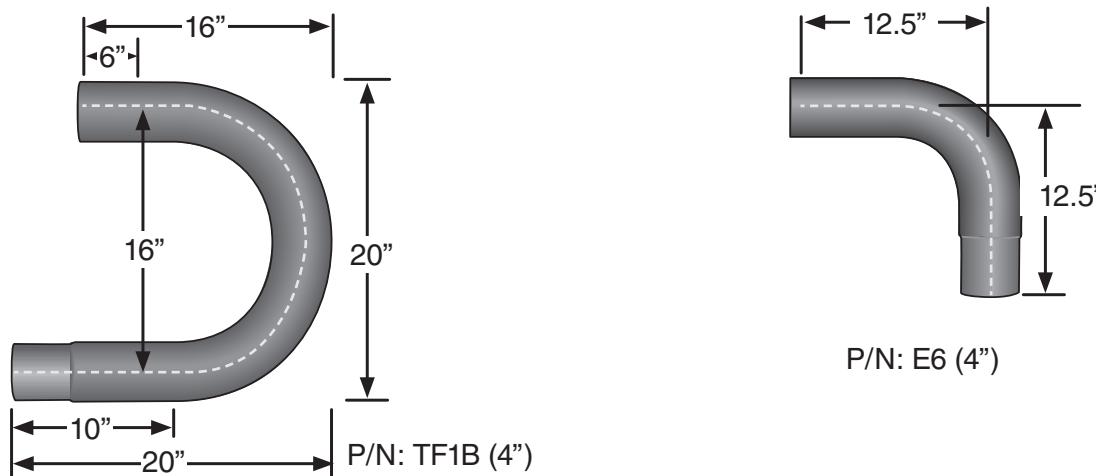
• Elbow and U-Bend ClearancesFigure 3.13 • U-Bend and Elbow Dimensions
